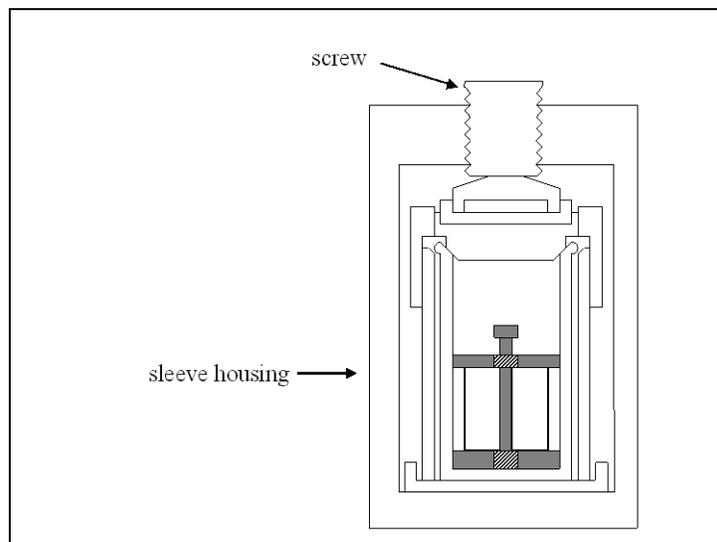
Sleeve assembly in pie-shaped-sleeve housing.
